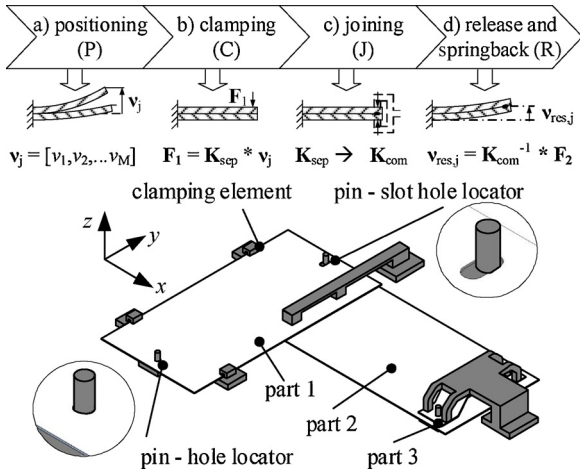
Sheet metal assembly process in conventional fixturing systems (top, [9]) and exemplary fixture setup (bottom).
